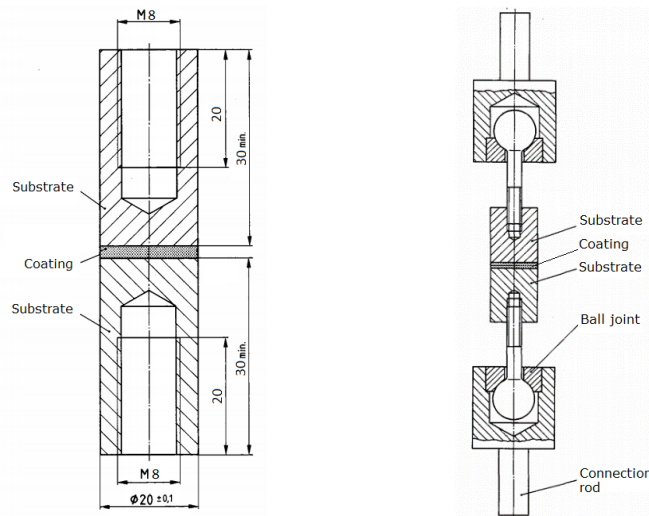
Tensile test sample: a) geometry, and b) clamping
